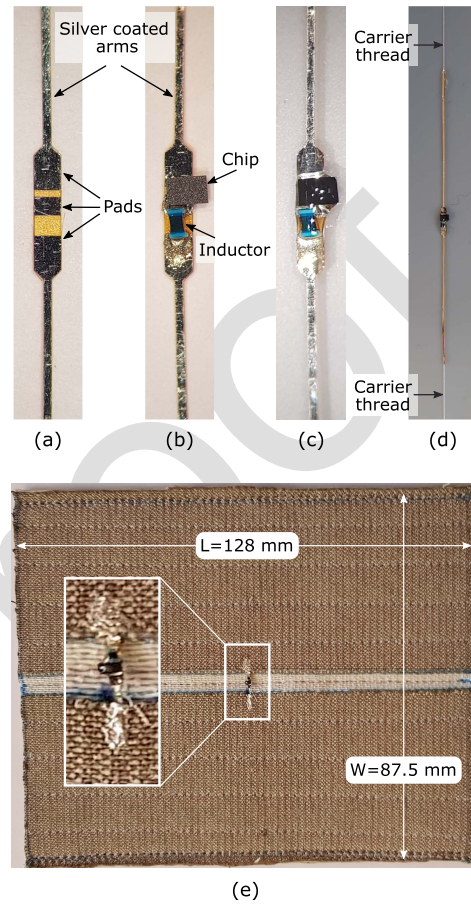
Chip mounting procedure. (a) Polyimide piece with silver coated arms and pads. (b) RFID chip and inductor soldered. (c) RFID chip and inductor protected with epoxy resin. (d) Dielectric carrier thread glued onto the back side of the polyimide piece. (e) Picture of the manufactured RFID tag. Inset: magnification of the chip area.
